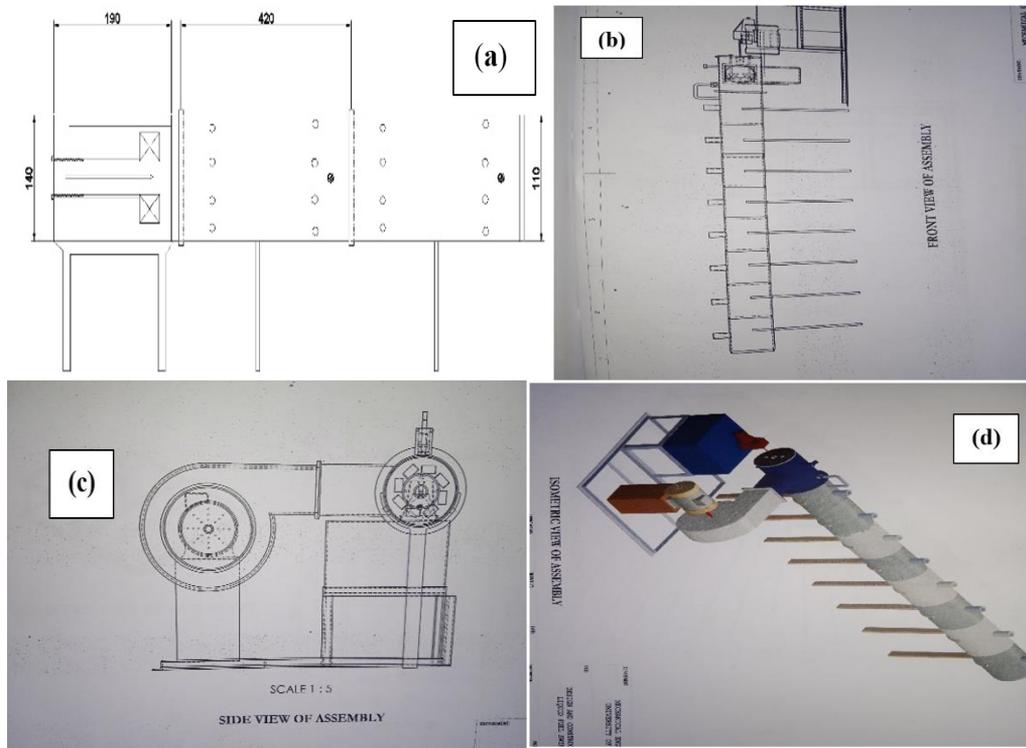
Liquid fuel swirl burner (a) Schematic arrangement (b) Front view (c) Side view (d) Isometric view
